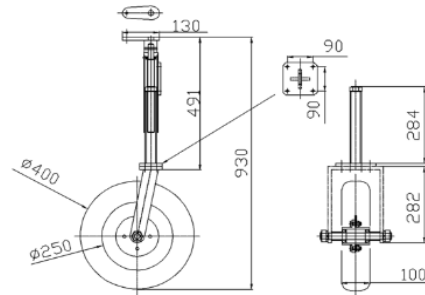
Schematic of the rear wheel for adjusting crushing height(unit: mm).
